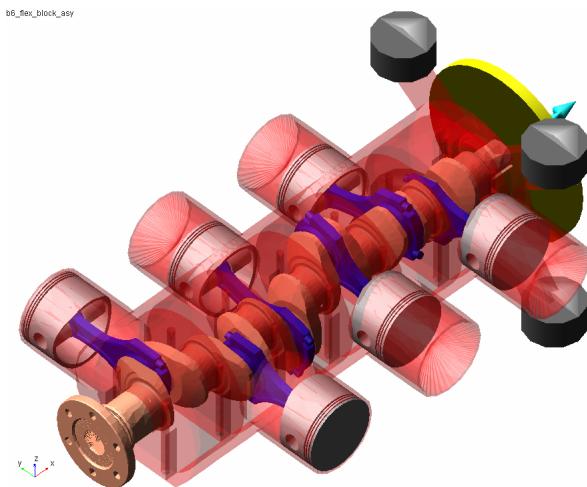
The model of horizontally opposed six-cylinder engine with flexible crankshaft and flexible engine block
